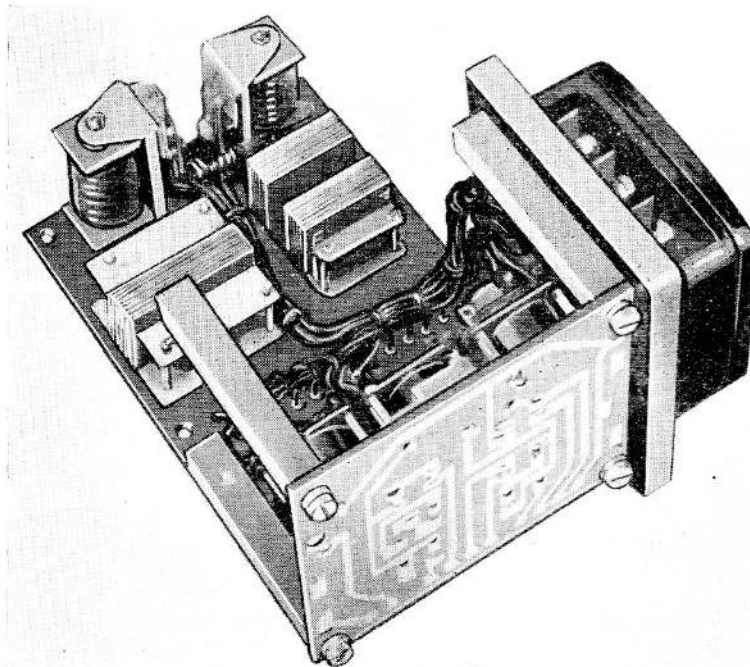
Controller with case removed showing printed circuitry and folding construction
